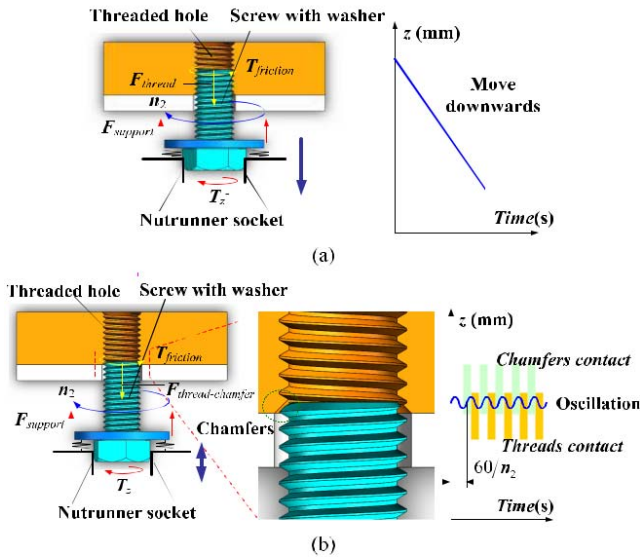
Position (in the z-axis) of the screw and robot-tool system in unfastening. (a) Moving downward during unfastening. (b) Oscillating when the screw is free from the threaded hole.
